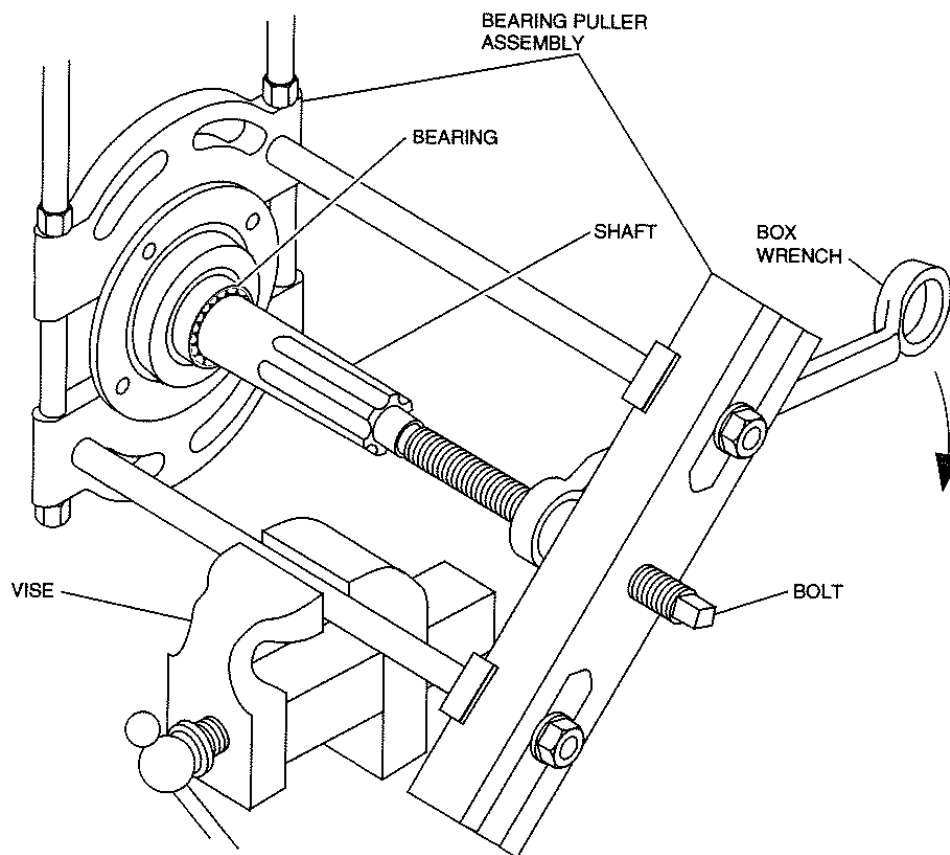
Removing Bearing, Using Manual Bearing Puller
